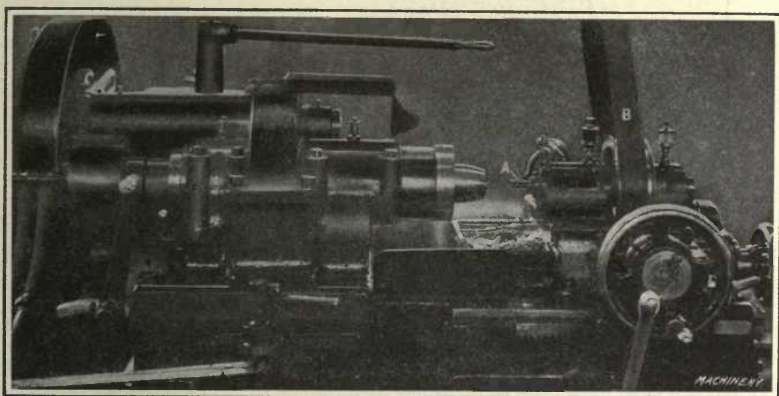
Milling Threads in Nose in a Special Lees-Bradner Thread Milling Machine
